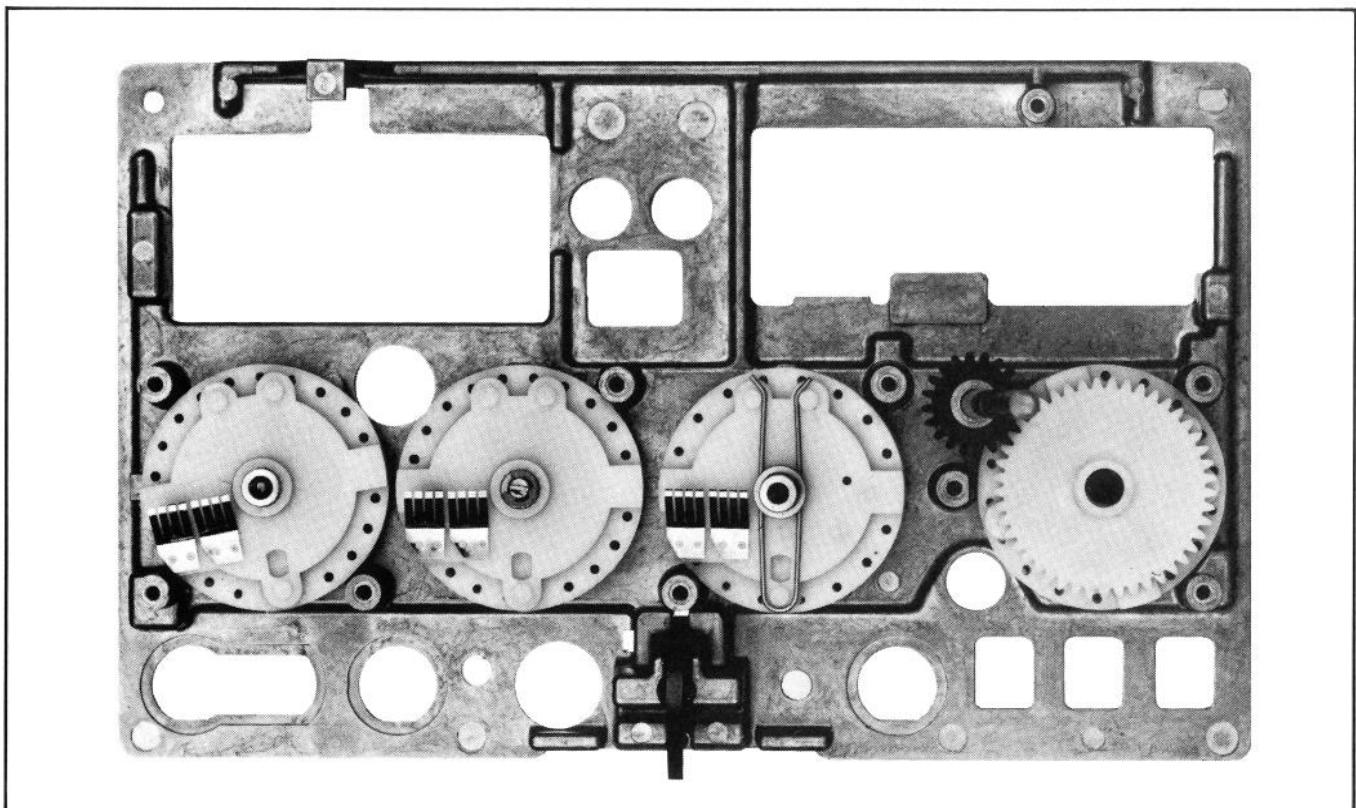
PROPER POSITIONING OF ROTORS ON FRONT SWITCH DIECAST
